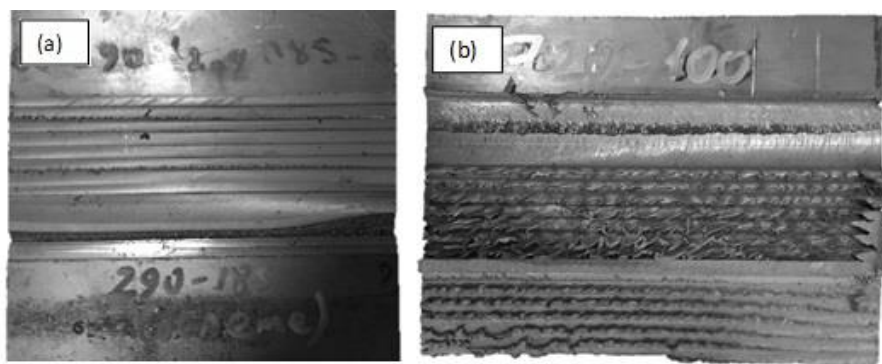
Top view of the plates FSPed with the overlapping technique
